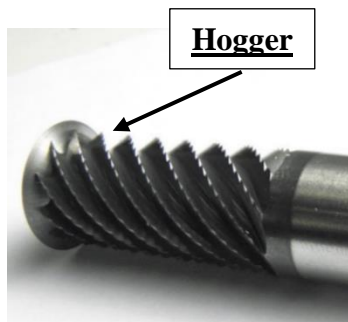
Milling cutter used for Nomex® honeycomb core "CZ10".
